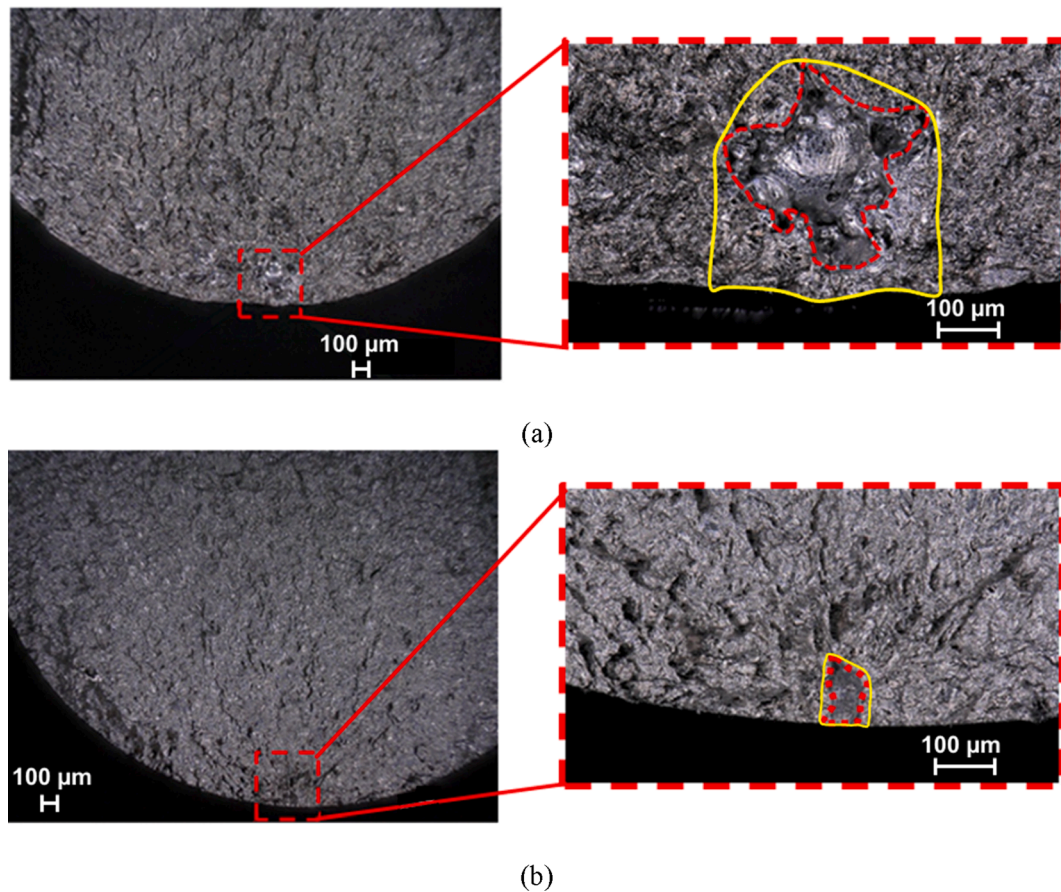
Fracture surfaces showing LoF defects responsible for initiation of crack in specimens with M/P surface condition subjected to (a) R-B loading with $2N_f = 263,200$ reversals and (b) axial loading with $2N_f = 84,400$ reversals. Both specimens were tested at stress amplitude of 350 MPa and fabricated using Machine A. Red dotted line represents the actual defect size, while yellow solid line is the defect size determined using Murakami's approach. (For interpretation of the references to colour in this figure legend, the reader is referred to the web version of this article.)
